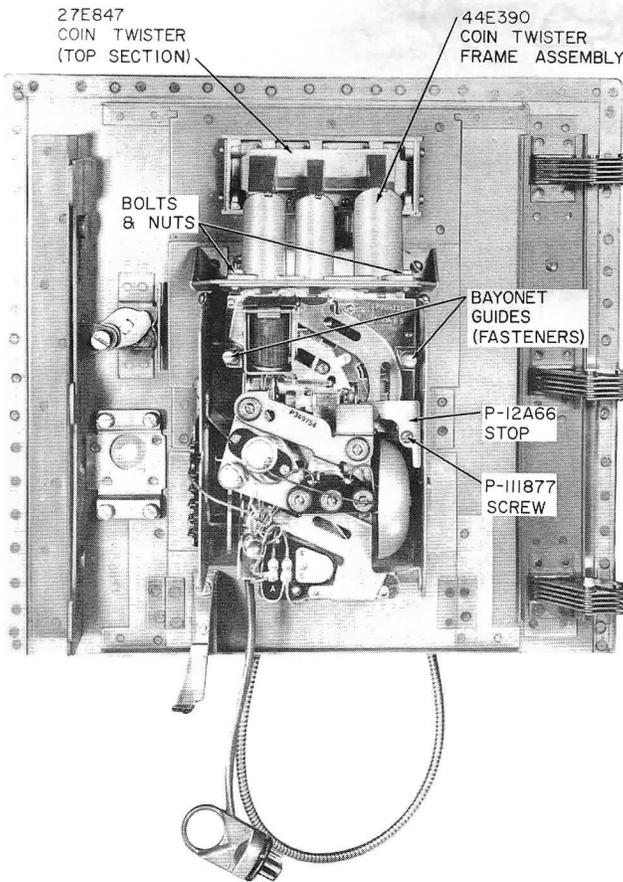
Location of Mounting Hardware for Coin Chute and Twister Assembly
